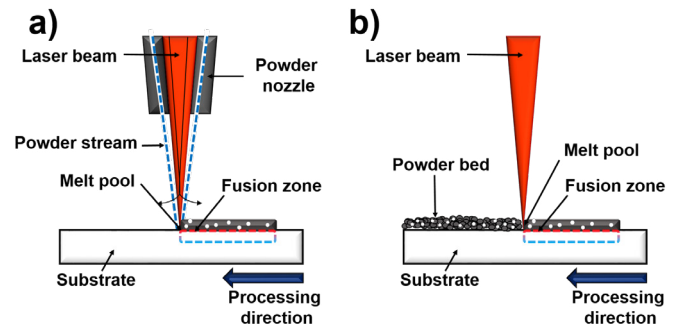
Representative scheme of the (a) DED and (b) L-PBF laser additive manufacturing technologies.
